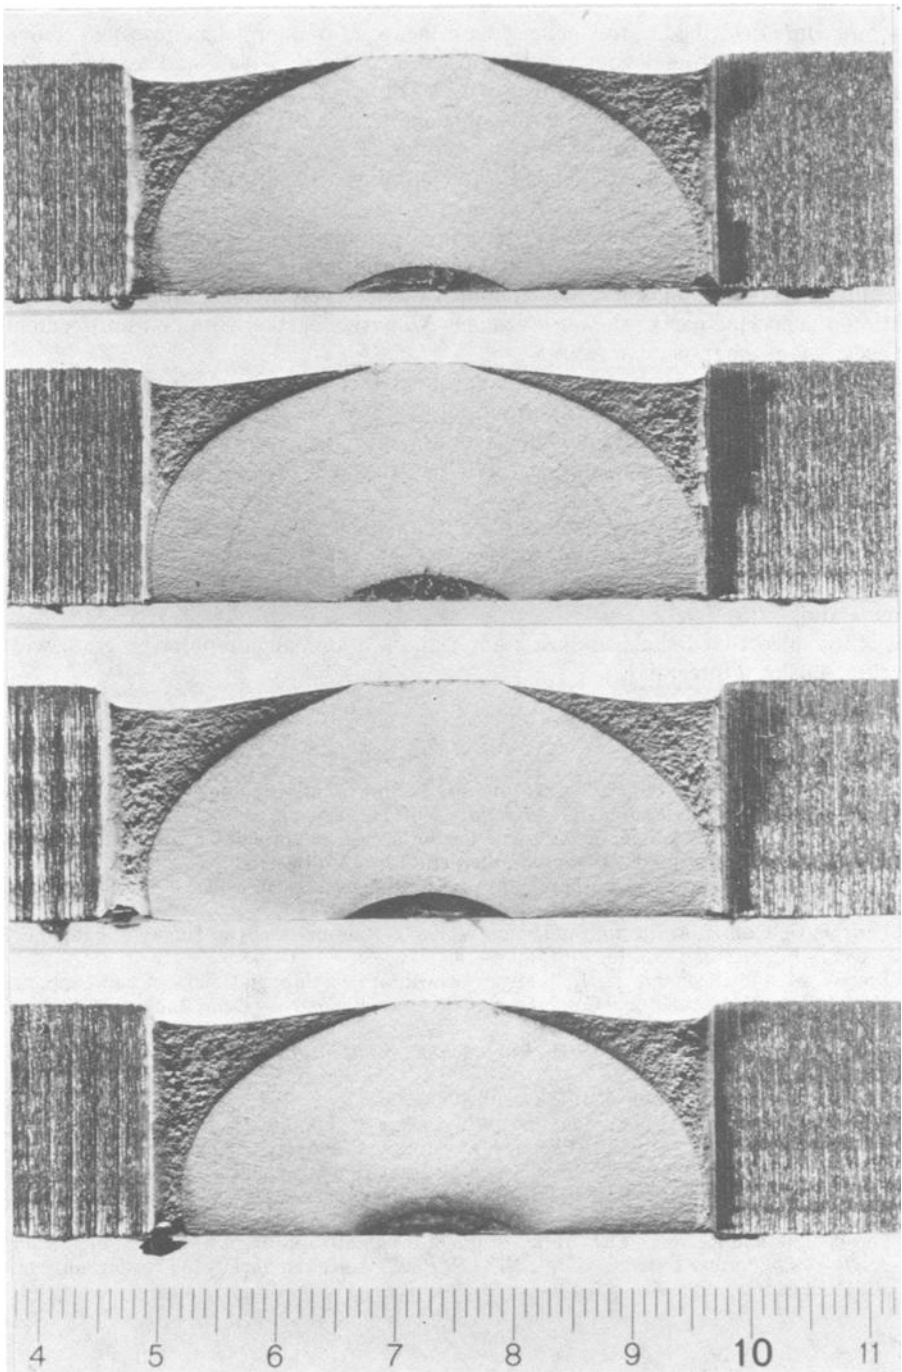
Fracture surfaces of four tension plates specimens.
